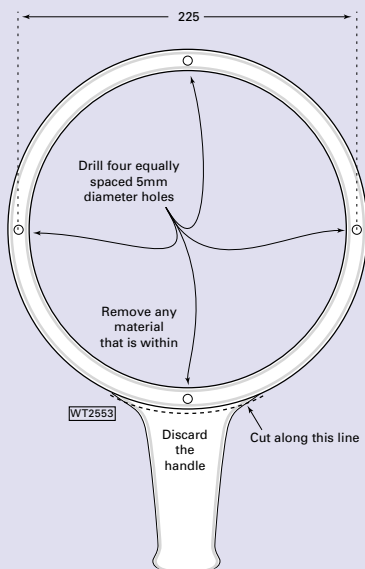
Cutting and drilling details for the plastic racquets, you'll need six of them for this design.
